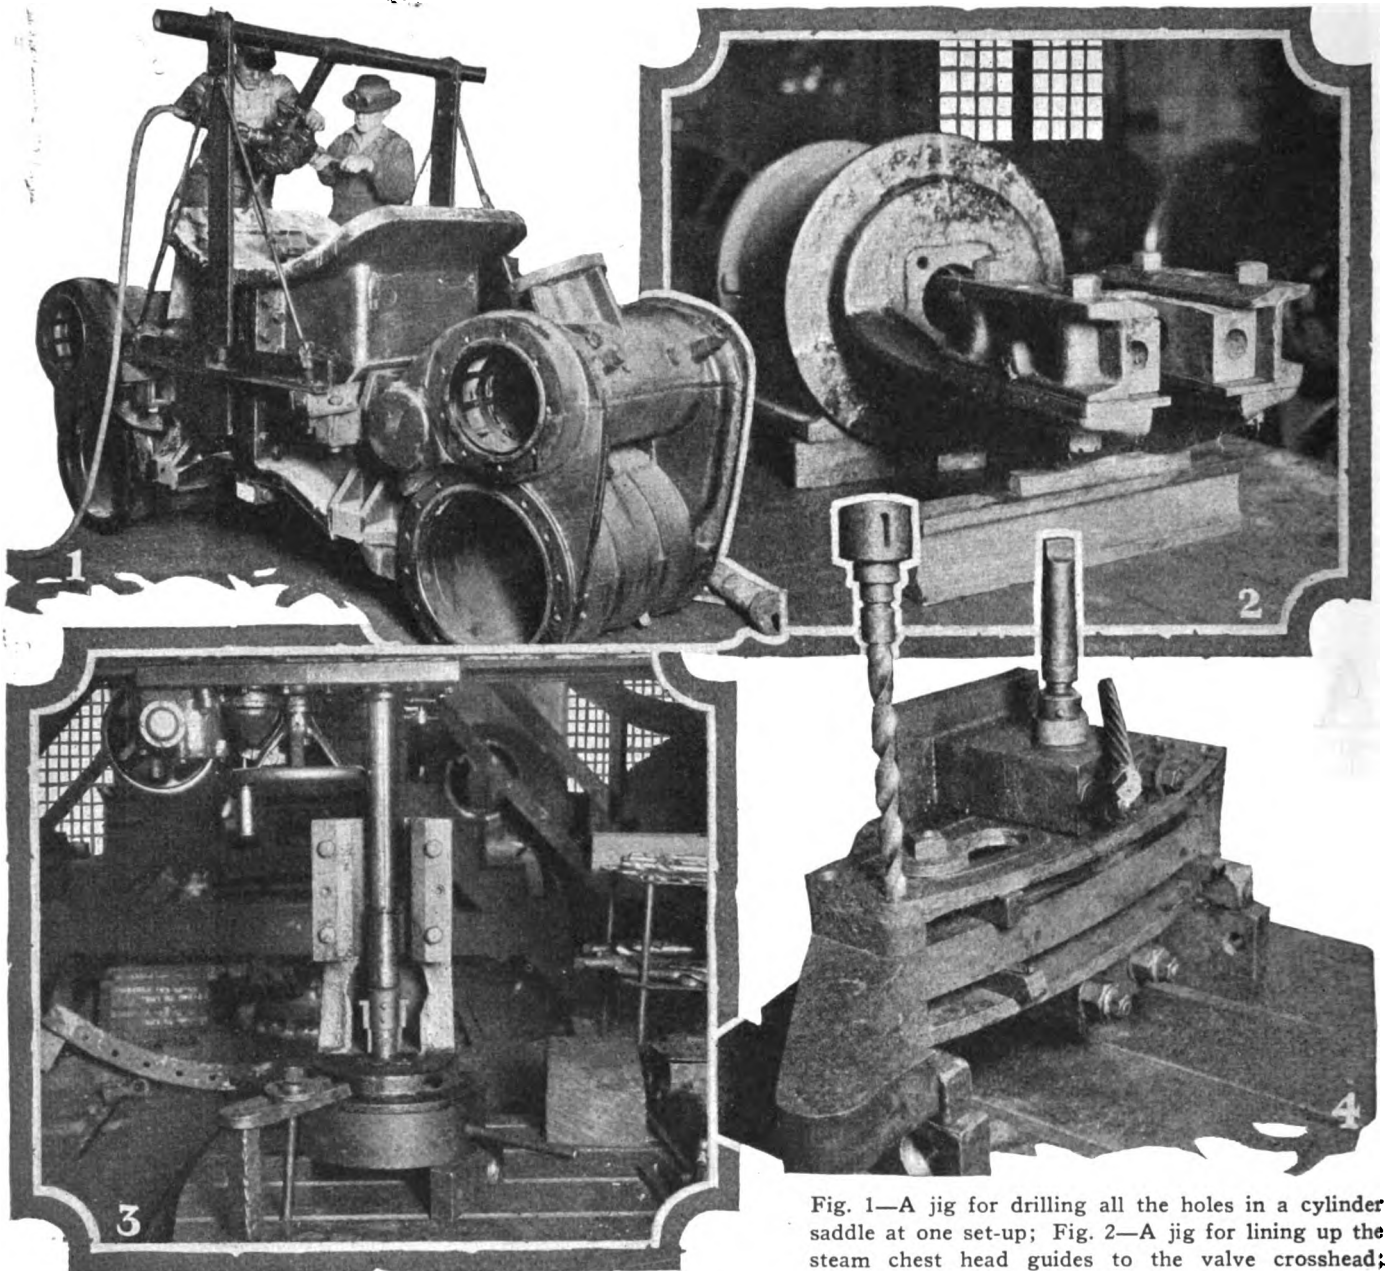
shows a jig used for boring out the back steam chest head stuffing box. The jig consists of a cast iron shell, the bottom of which is bushed to fit the boring bar. The top is bored out to take the cylinder fit on the back steam chest head. The jig is set on two parallel strips on the table of a radial drill press. The steam chest head is then placed in the jig and the whole is held on the table by two clamps. A 3-in. cutter is placed in the boring bar. The smaller diameter of the cutter makes the roughing cut while the larger diameter makes the finishing cut. At the same time it forms the joint for the gland and also acts as a stop for the depth of the cut. This is a simple and quick method of boring out an awkward casting.
